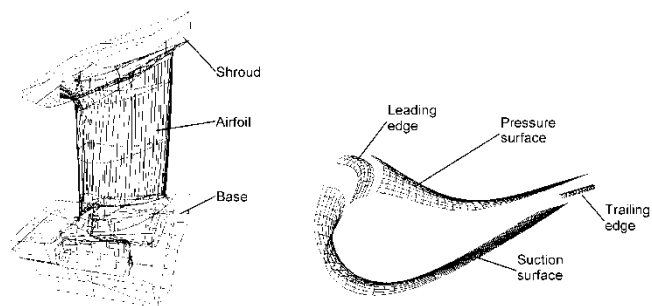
The CAD model of the complete turbine blade and an exploded view of the airfoil section indicating four constituent entities.
